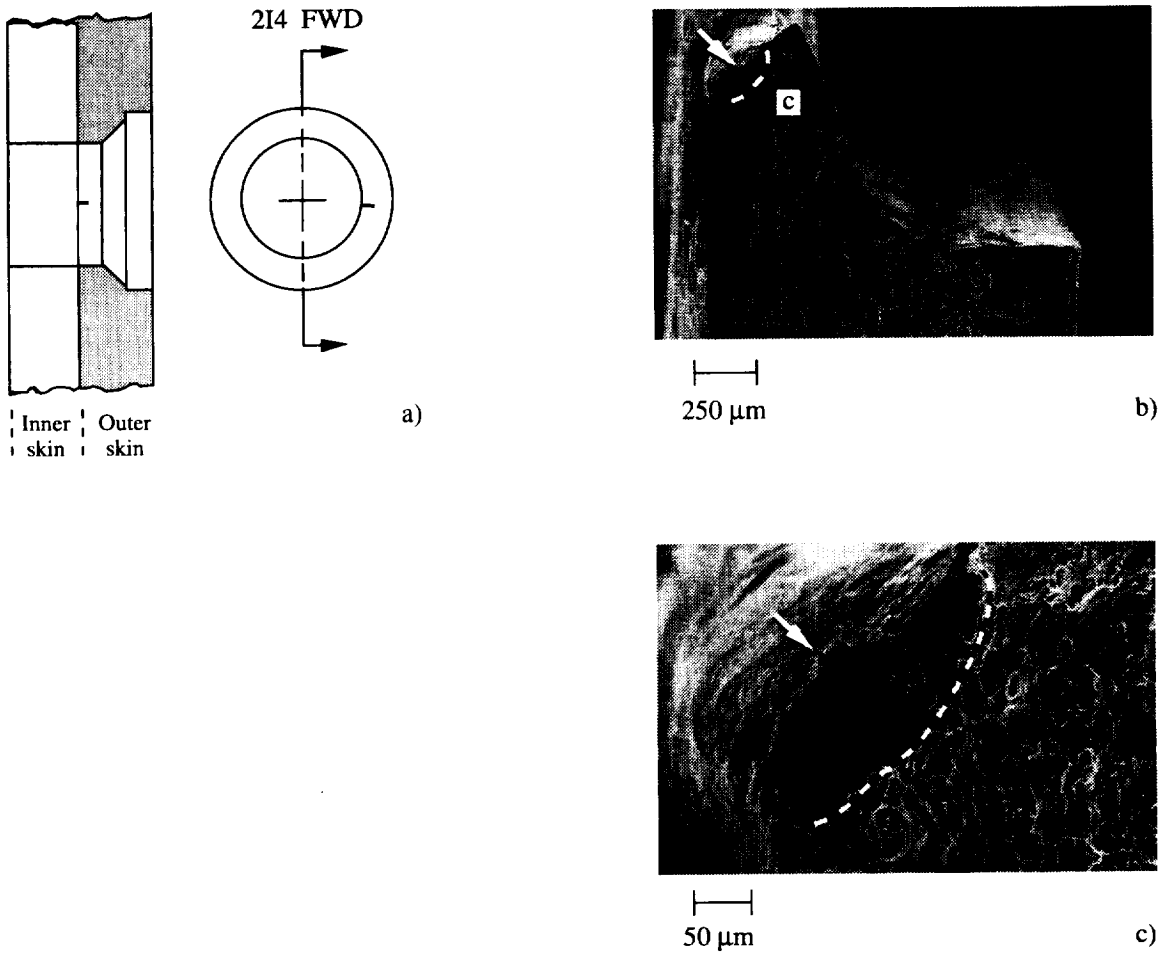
a) The schematic shows the rivet hole 2I4 configuration and the location of the outer skin fatigue crack oriented in the forward direction and about the 3 o'clock position. b) The SEM micrograph shows a small fatigue crack at the rivet hole corner marked by an arrow. c) The SEM micrograph shows the fatigue crack in Figure 7.24.b at higher magnification.
